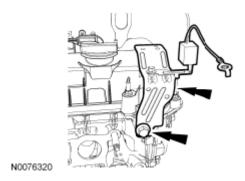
Locating Intake Manifold Courtesy of FORD MOTOR CO.
